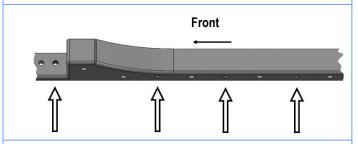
Driver Side Support Bracket Installed on Pinch Weld
